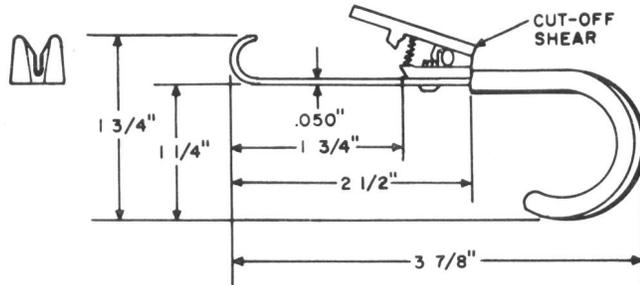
KS-20620, L2 or L3, Wire Stripper Tool
